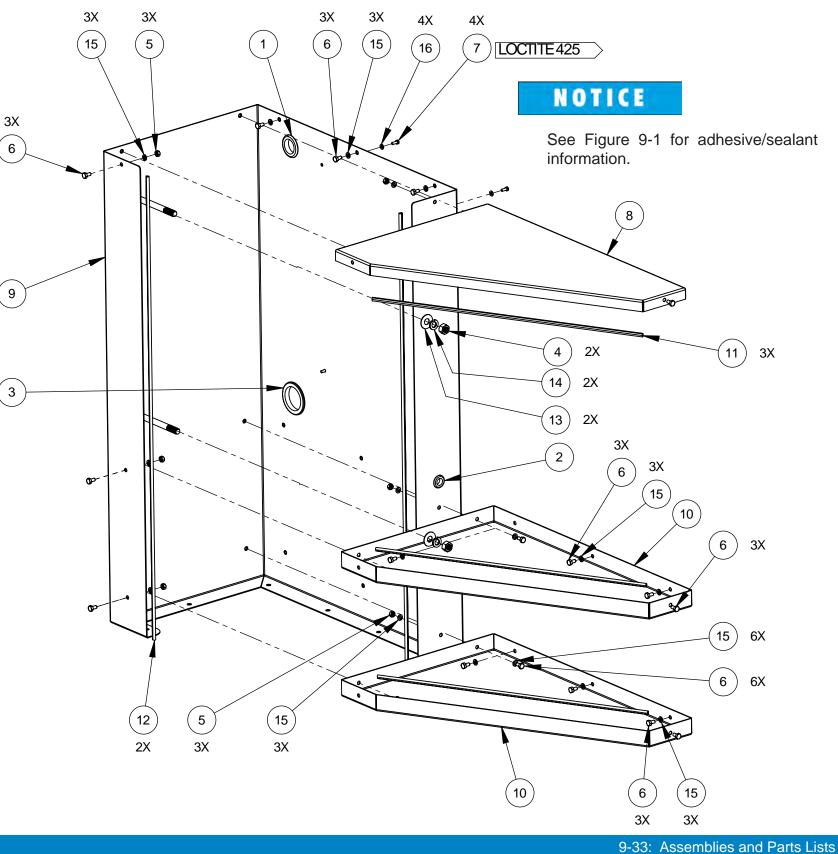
EWS Rack Assembly 000-163-095 Rev. E
